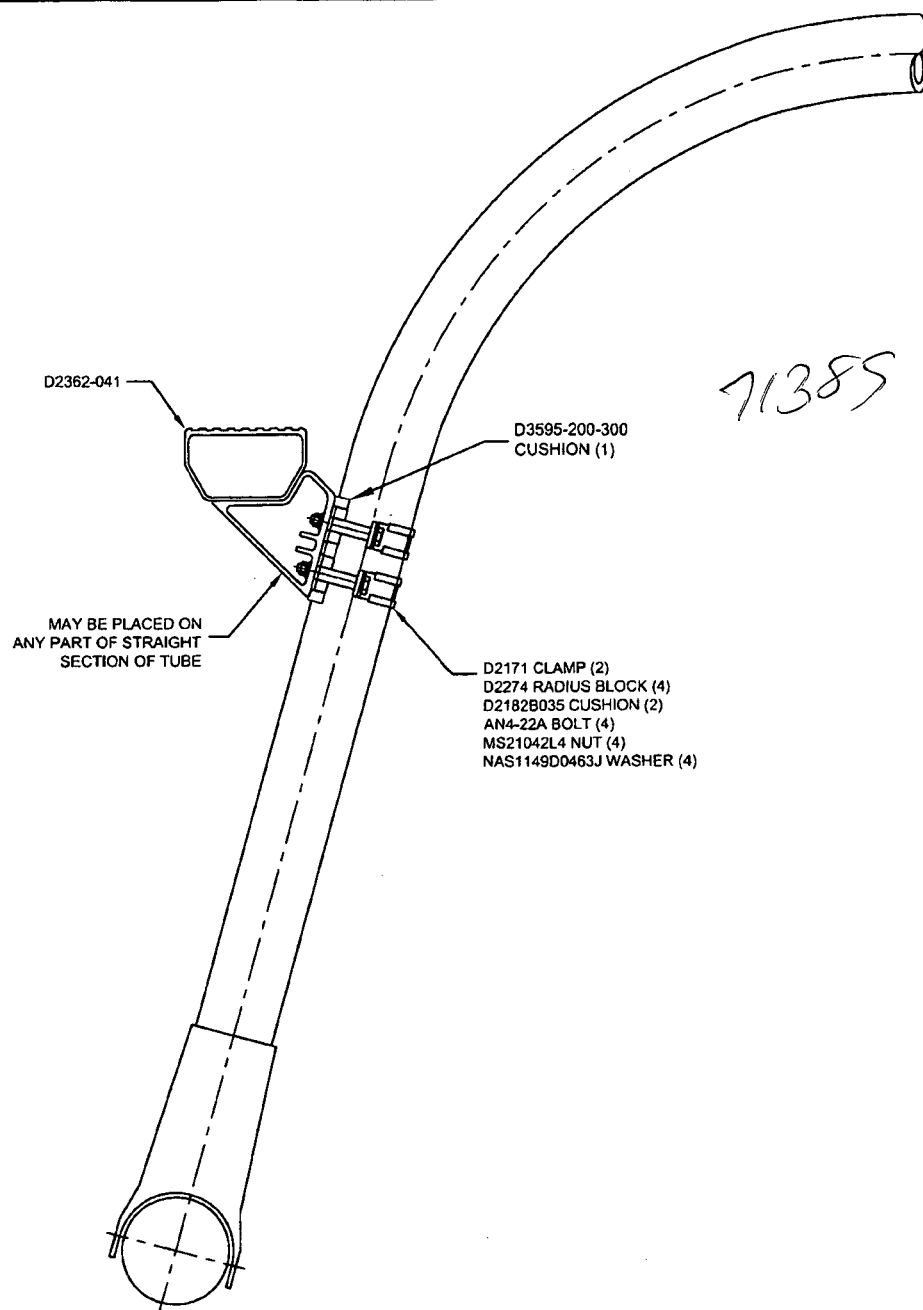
D350-591-117A Heli-Access-Step™, Pre-Flight Step
